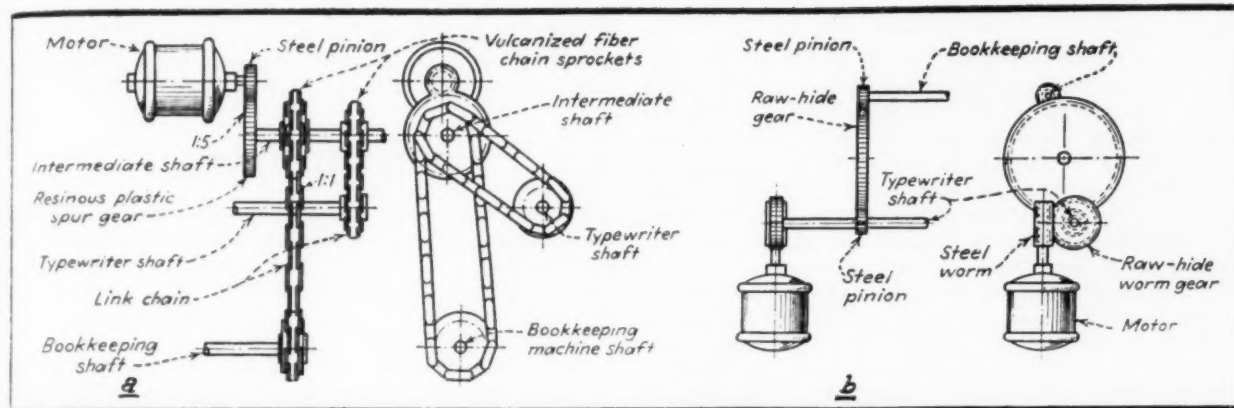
(a) TYPEWRITER AND BOOKKEEPING MACHINE WITH NOISY POWER TRANSMISSION. (b) REDESIGN FOR QUIET POWER TRANSMISSION
